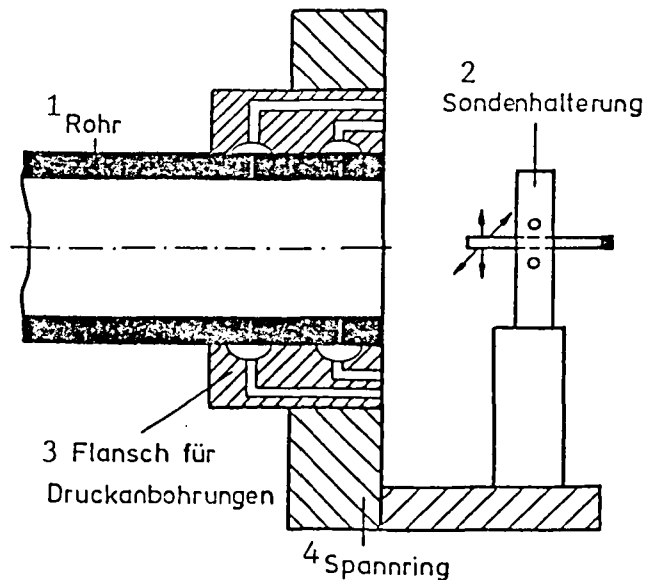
/3: Flange with Pressure Holes for Attachment of the Sliding Device
